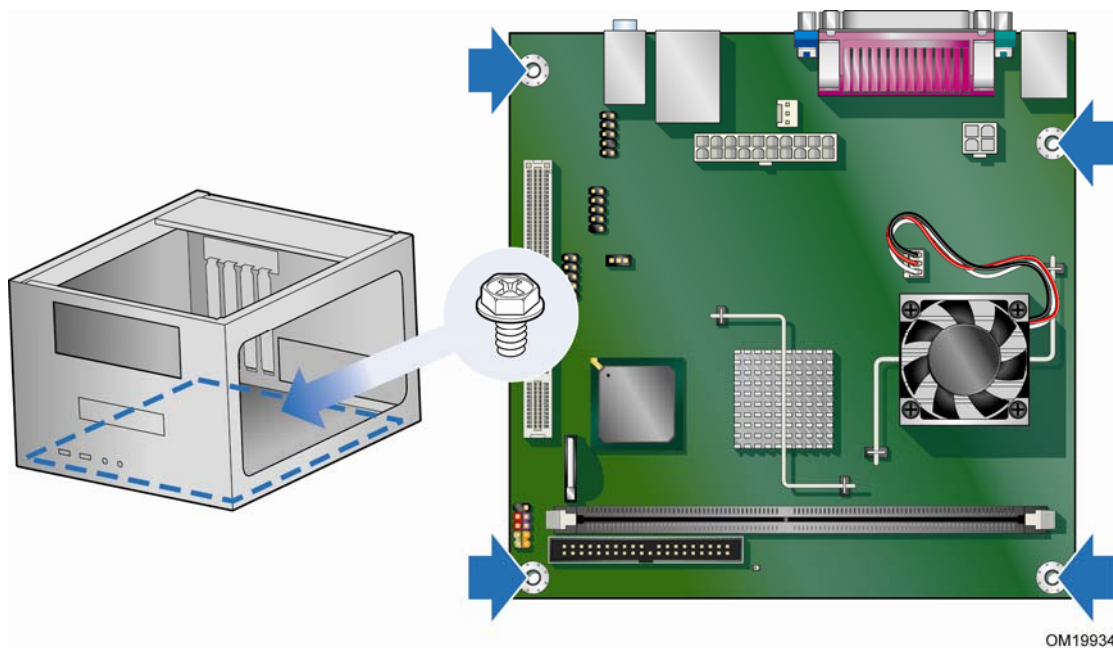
Desktop Board D201GLY Mounting Screw Holes
